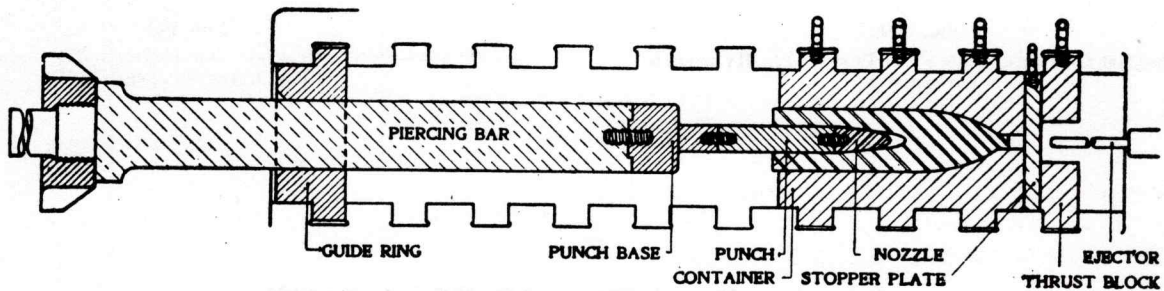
Fixture for Shaping and Punching Large Shell.
